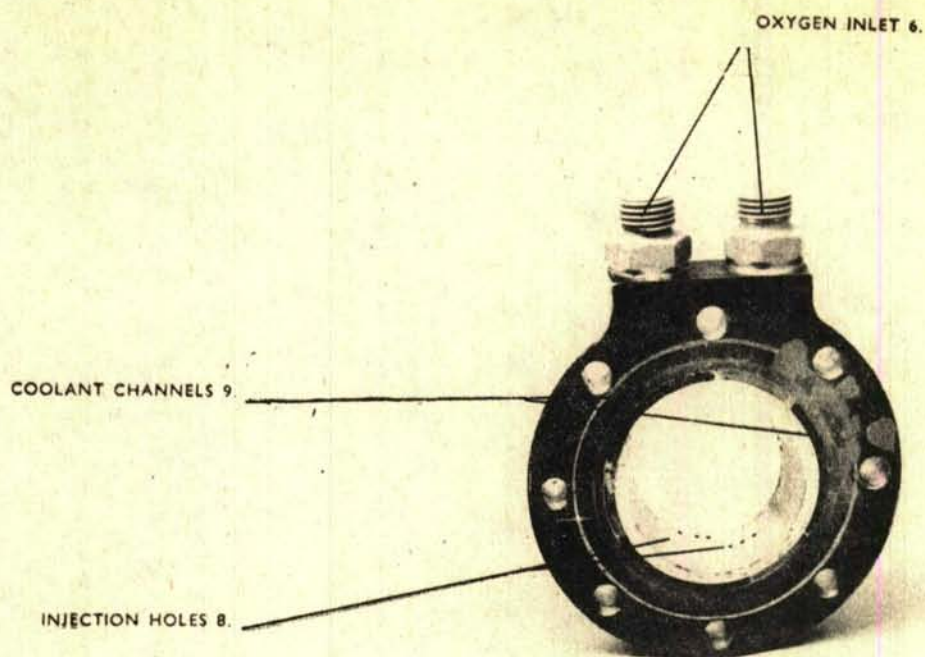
OXYGEN INJECTOR OF ROCKET MOTOR R.M.II.
